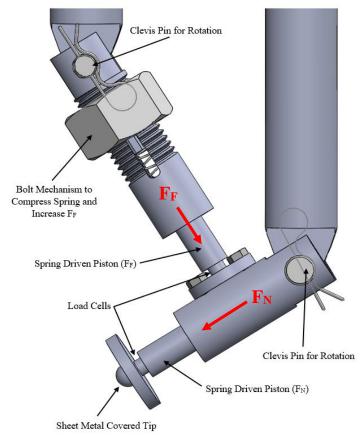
Close-Up of Pistons in CAD Model of Slidometer Design 1
